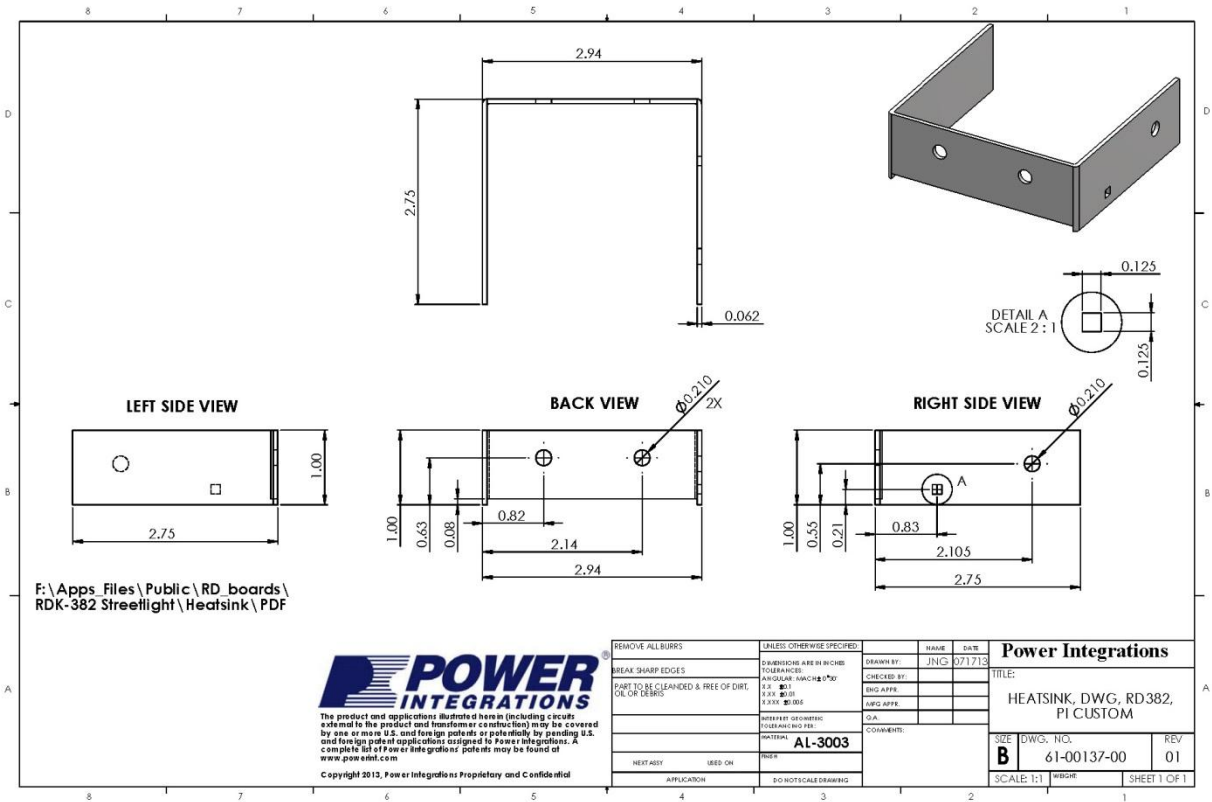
RD-382 Primary Heat Sink Sheet Metal Drawing.
